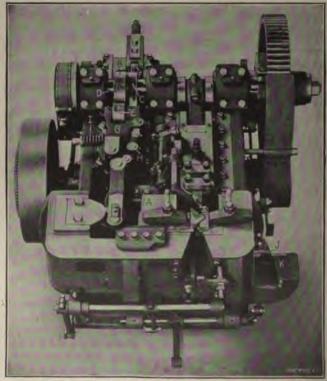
"National" Upsetting and Forging Machine having a Safety Relief Mechanism for operating the Gripping Dies
